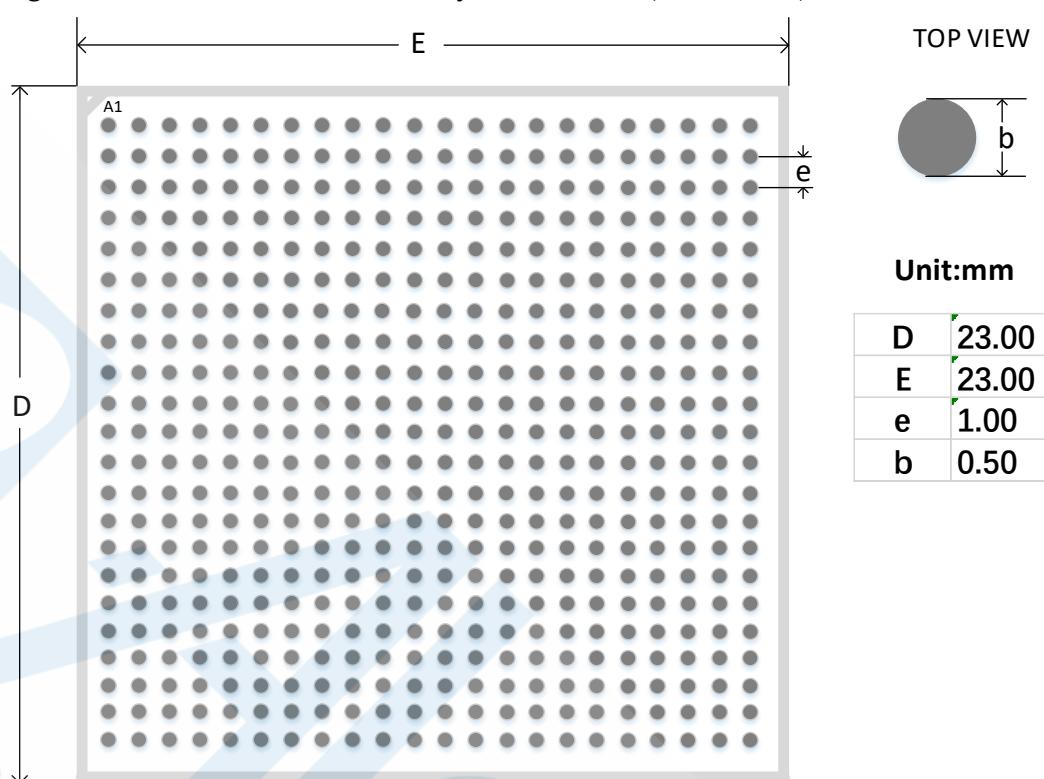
Recommended PCB Layout PG484A (GW5AT-60)
